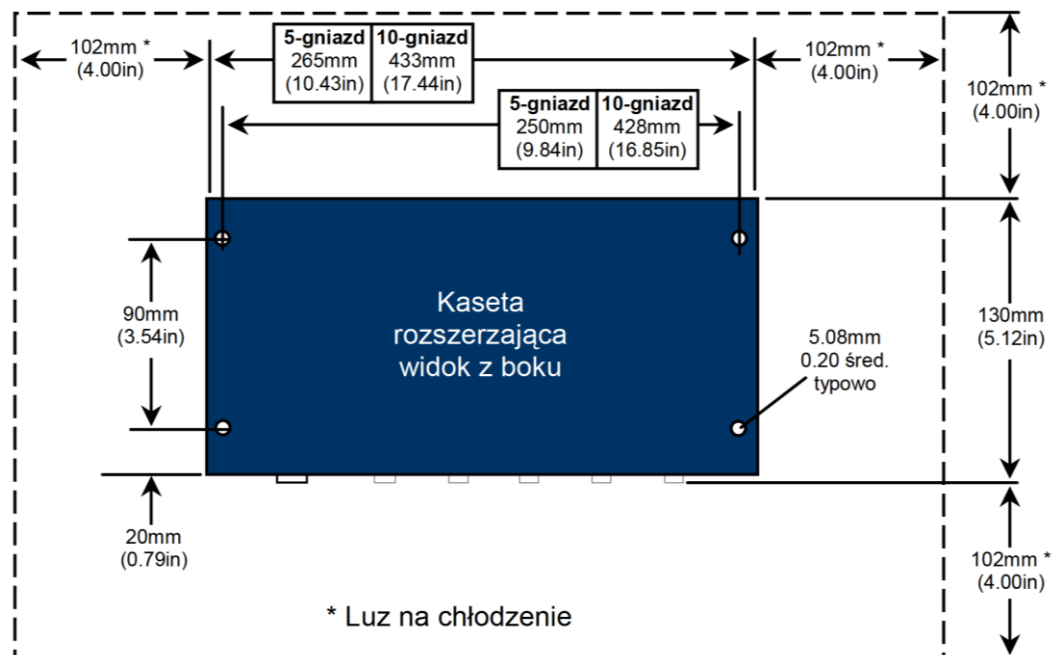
Dimensions of the RX3i serial expansion cassette and layout in the enclosure
